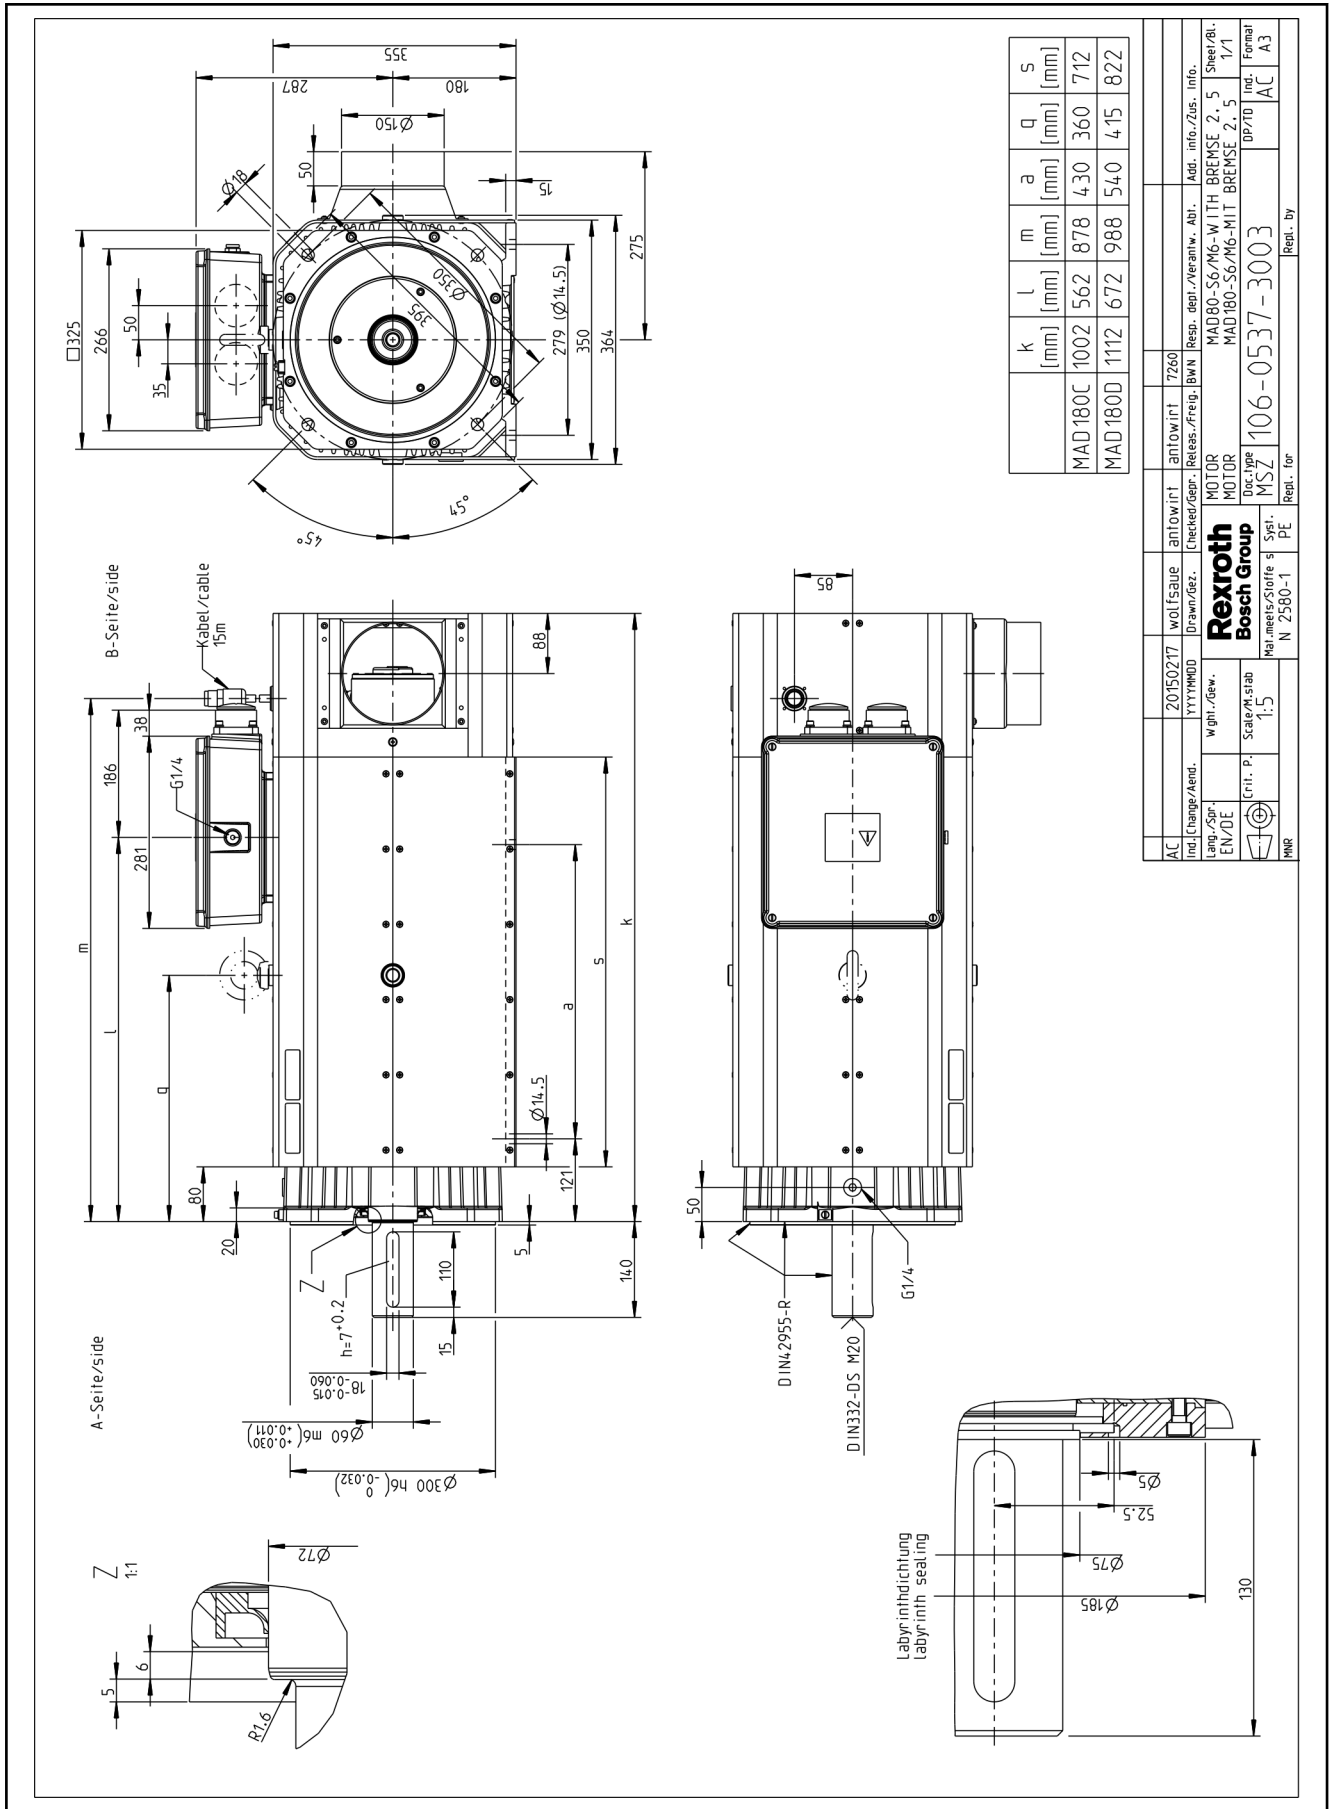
MAD180 with M6/S6 encoder, brake 2/5
